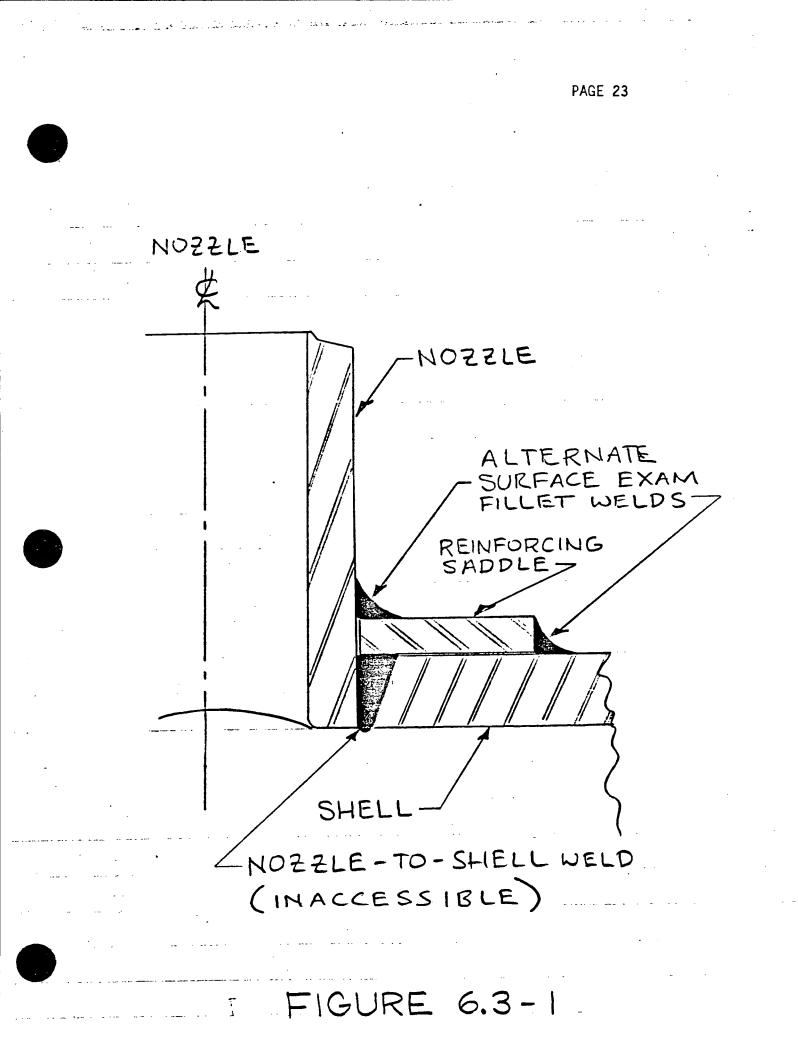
NOZZLE-TO-VESSEL WELDS
